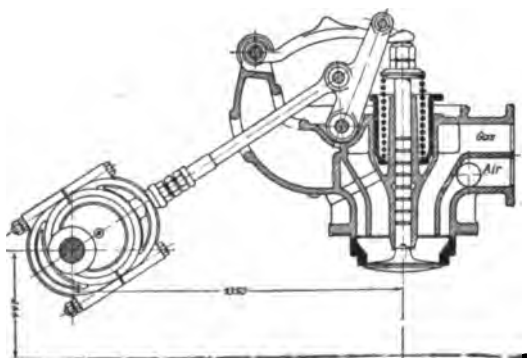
Modification of Inlet Valve Gear, Koerting Two-cycle Engine.
